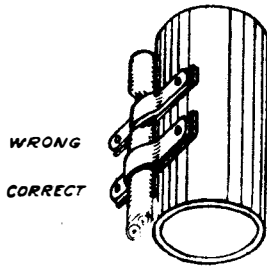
Clamp cable securely but don't make clamp so tight that cable is dented. ALWAYS lay cable flat on clamp.
